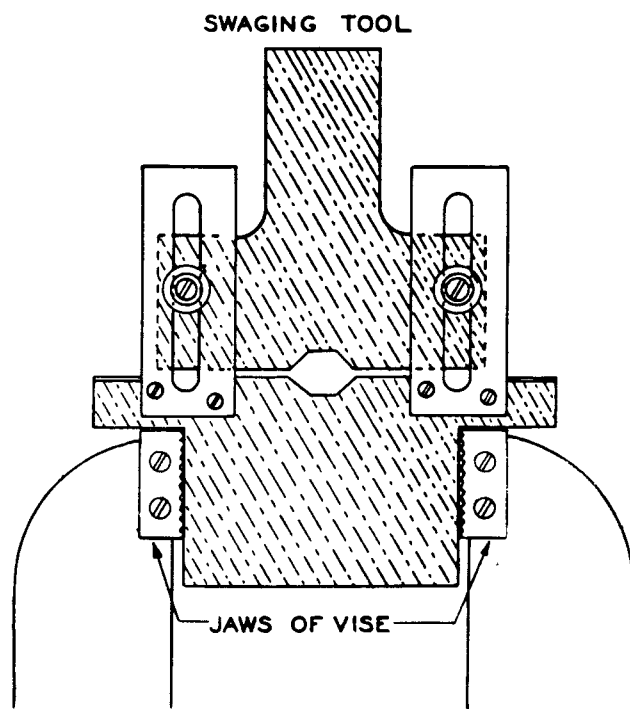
SWAGING TOOL FOR REMOTE TUNING CABLES
